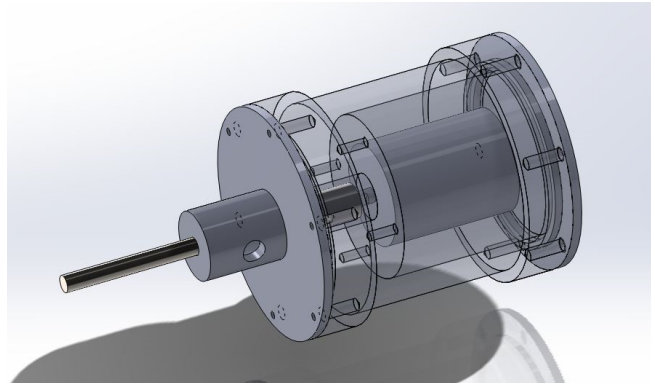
SolidWorks rendering of team designed motor housing and shaft seal
